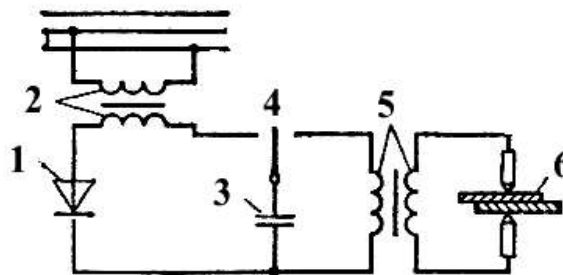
Percussion welding: 1 – rectifier; 2, 5 – transformer; 3 – capacitor; 4 – switch; 6 – parts to be welded
